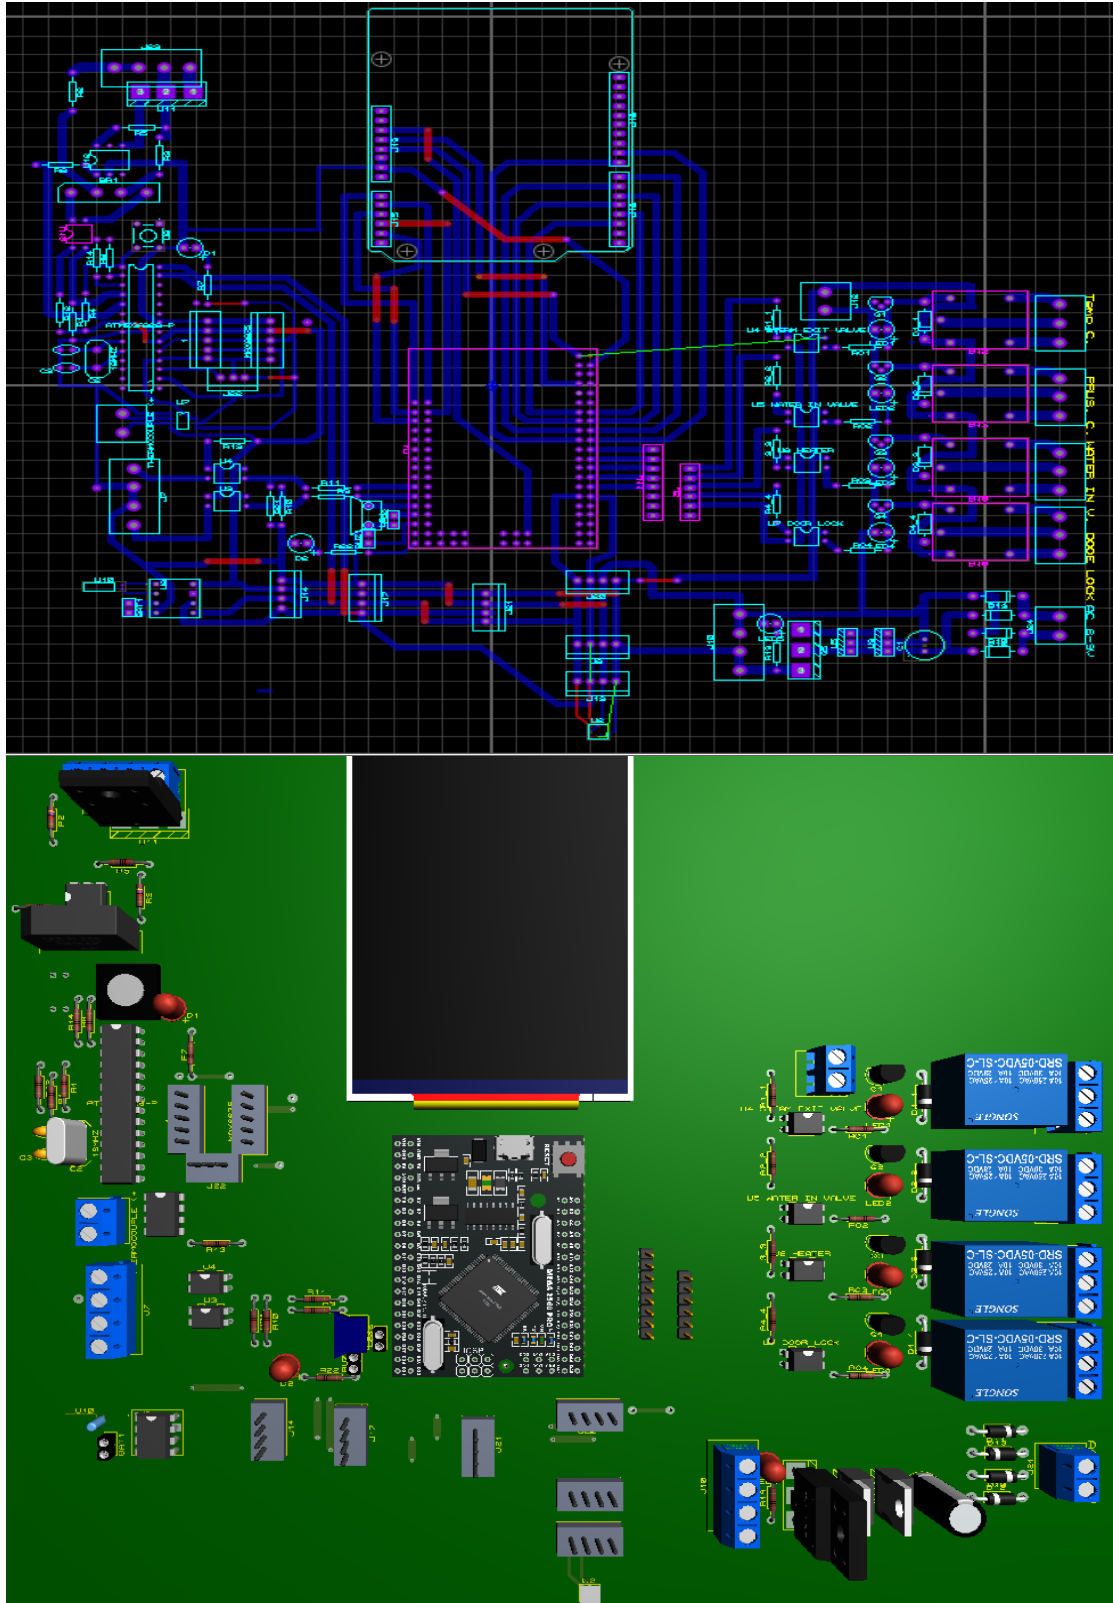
Control board of the smart steam sterilizer system: PCB layout (top) and 3D view (bottom).
